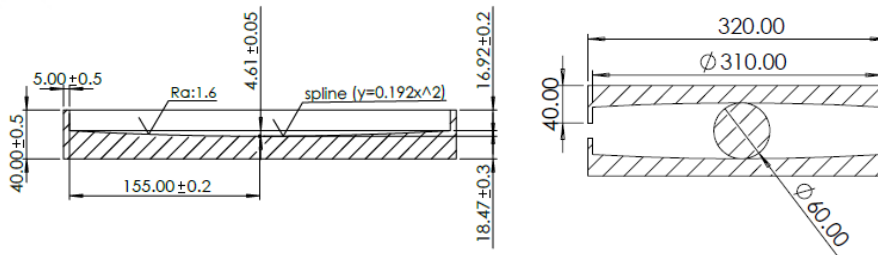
Two-dimensional CAD drawings of the second prototype of the RPI
